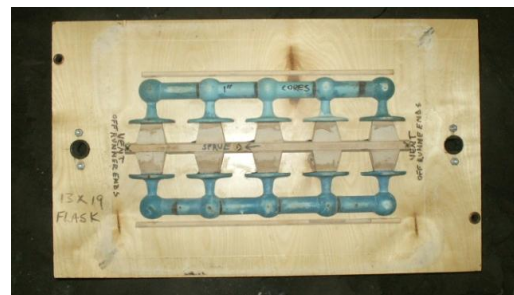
A hand rail match plate that has a ten part yield, with core prints, in-gates and runner mounted on the drag half.
